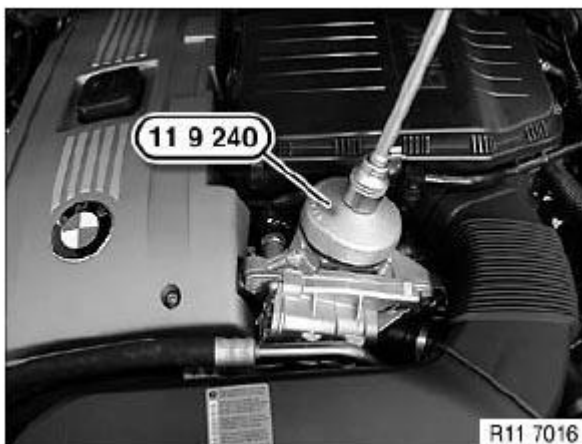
Removing Oil Filter Cover Using Special Tool 11 9 240
